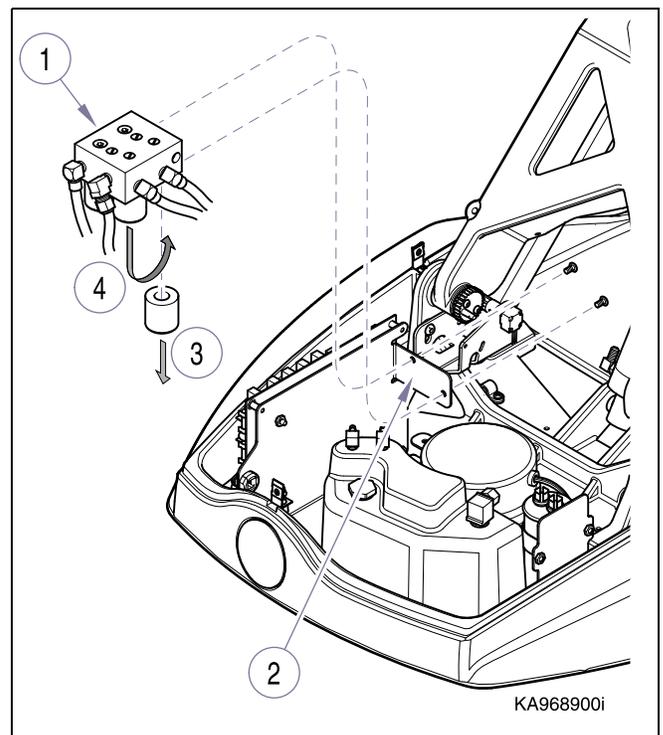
Hydraulic Solenoid Valve Assembly.
